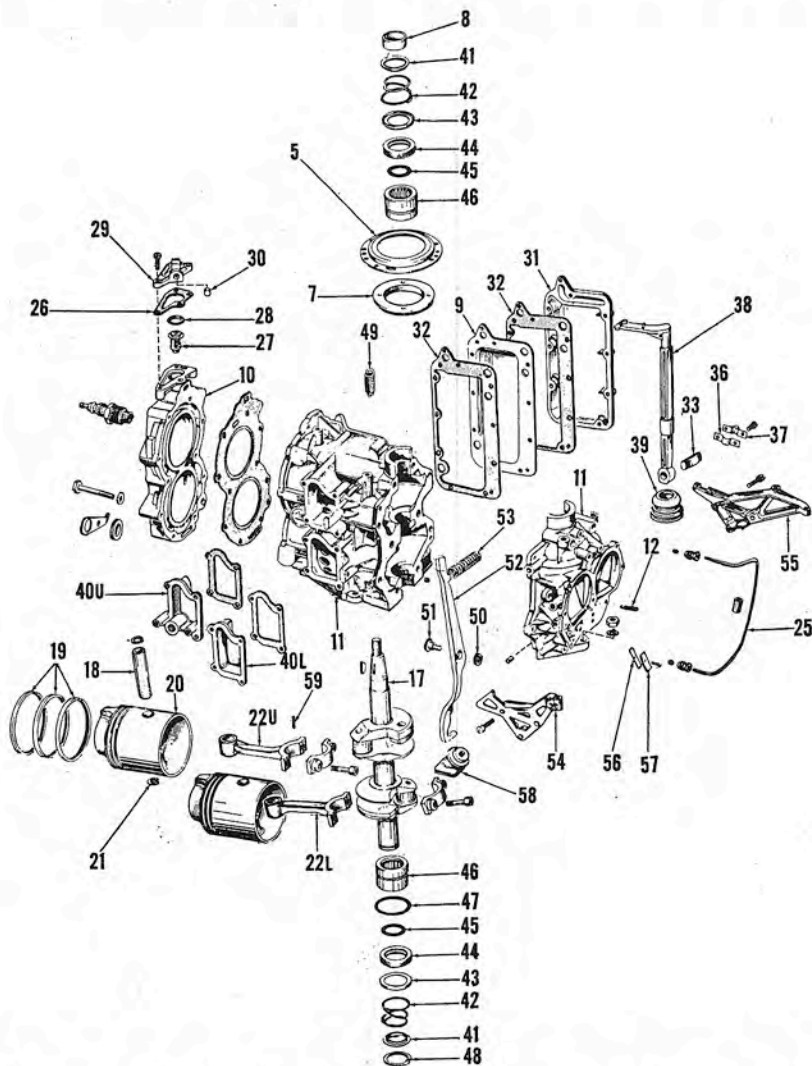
Exploded view of series QD power head assembly. Thermostat (26 through 30) was not used on motors before 1959.
